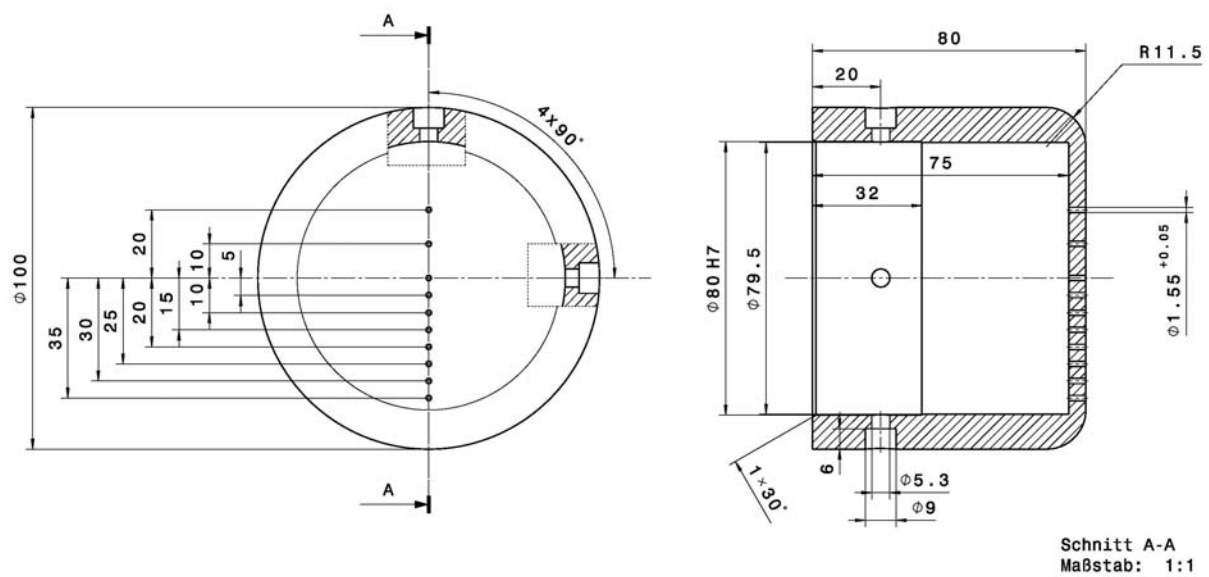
Technical drawing of the wind tunnel model with thermocouple instrumentation.
